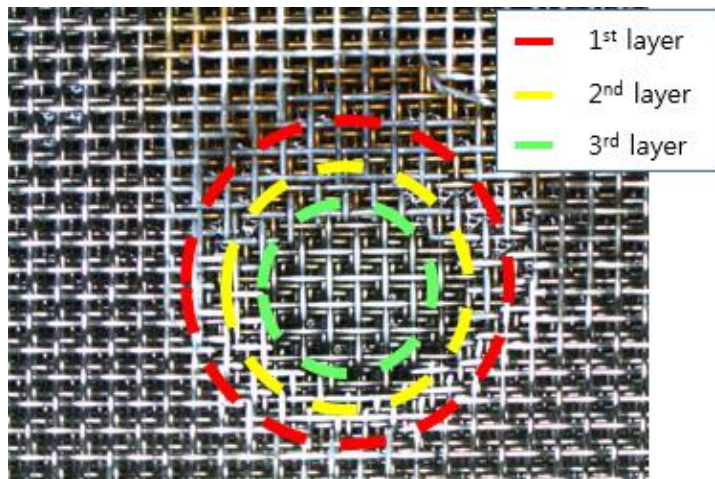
Machined hole after ECM using cylindrical electrode tool on STS304 Mesh
